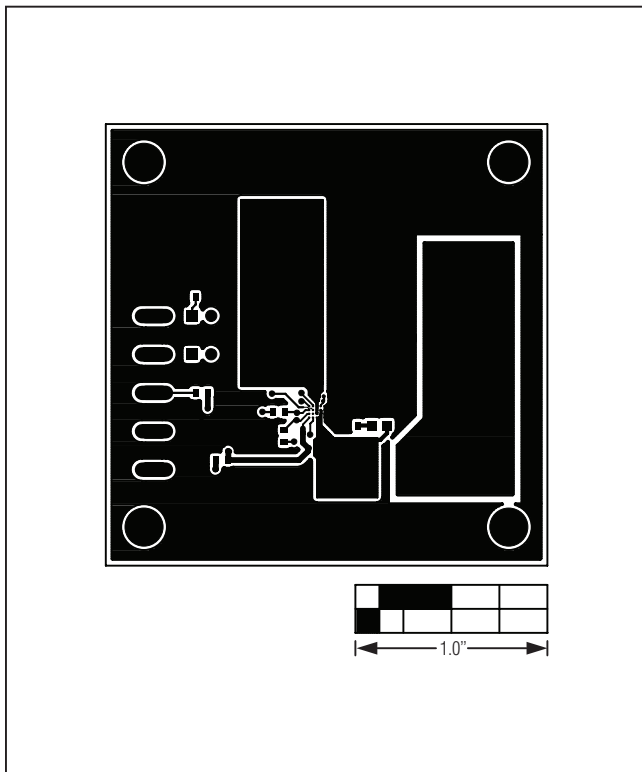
MAX15108 EV Kit PCB Layout—Component Side
